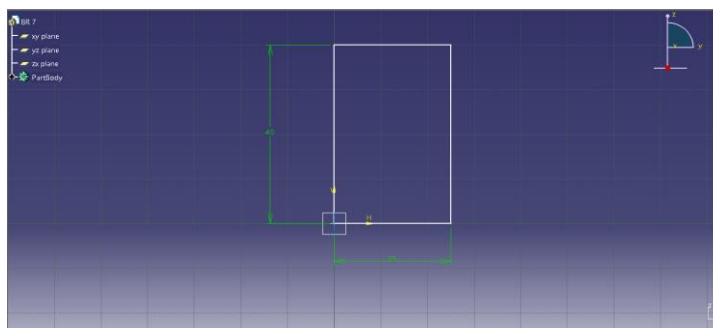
Geometrical Representation of Tool Shank in CATIA V5R20
